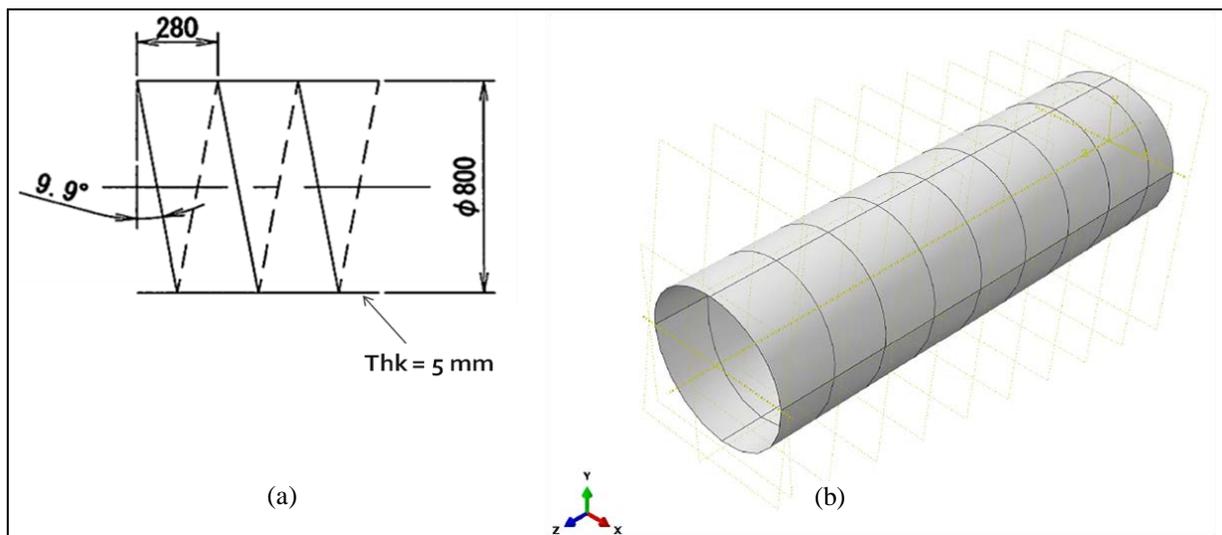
(a) Geometrical dimensions, (b) physical model of the jointed inserted pipe
